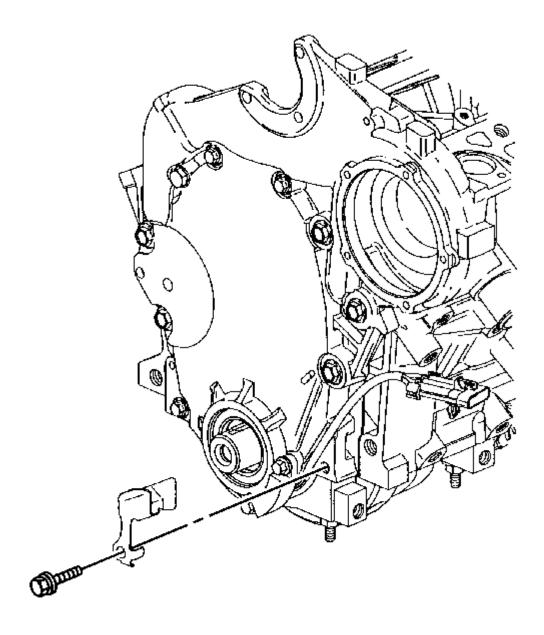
Removing/Installing Engine Front Cover Courtesy of GENERAL MOTORS CORP.
